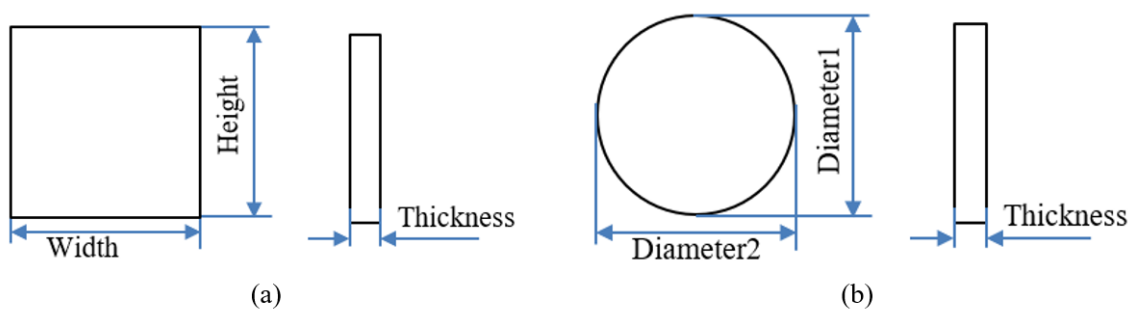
Simple shape measurement (a) cuboid shape and (b) cylinder shape
